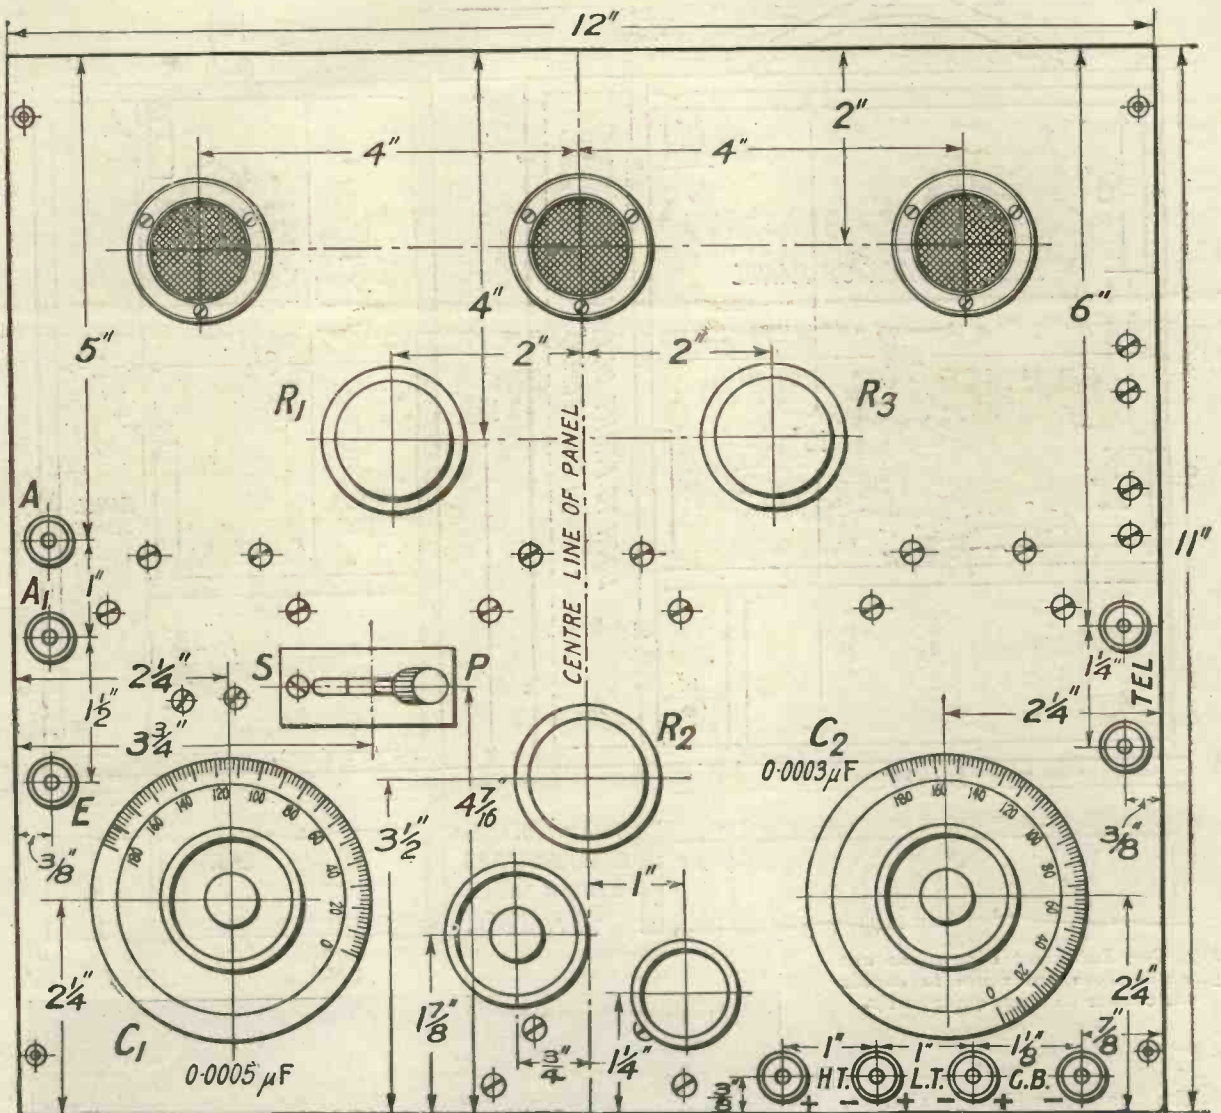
A half-size drawing showing the lay-out of parts upon the panel. Blue print No. 50a.
